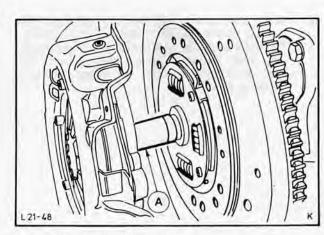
Centre clutch disc using A – Special Tool 21–044
